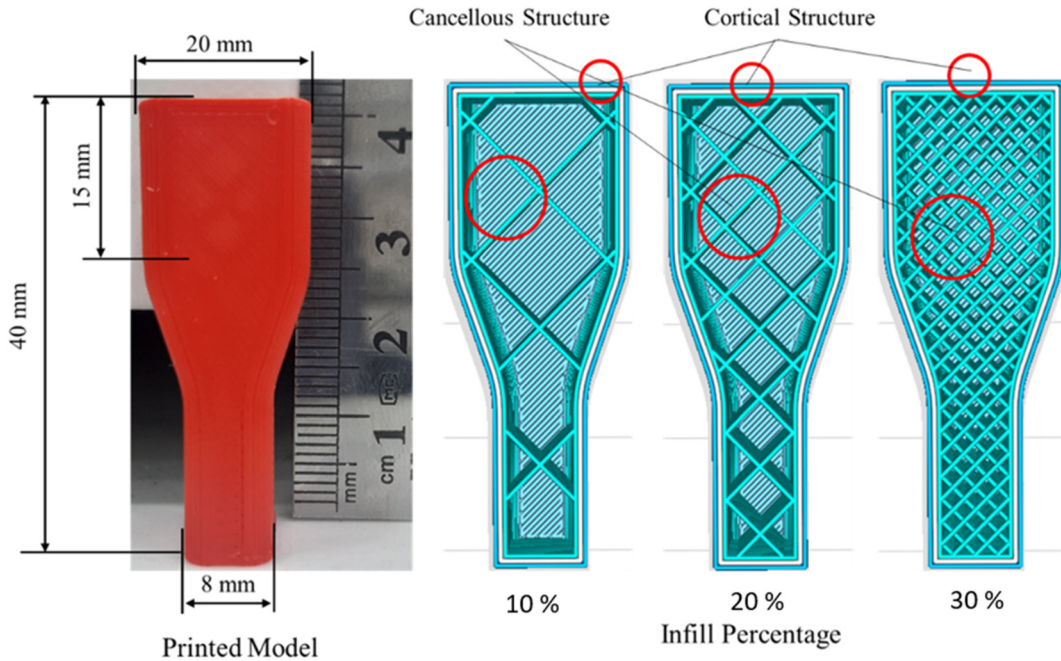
3D printed and internal structures (rectangular lattice structure) of the samples used in pull-out tests.
